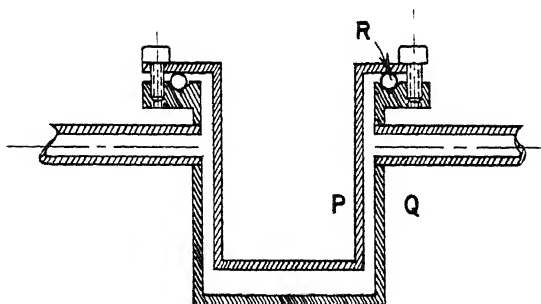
Sectional view of water-cooled collector-can assembly.
